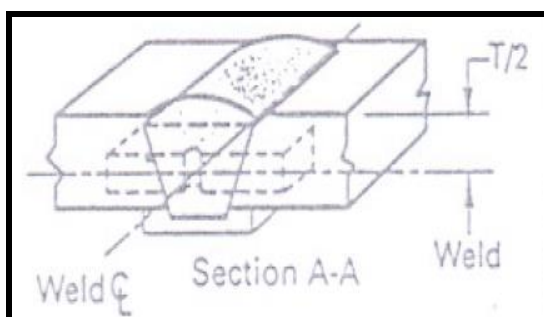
Schematic location of impact test piece in AWS all-weld assembly.
